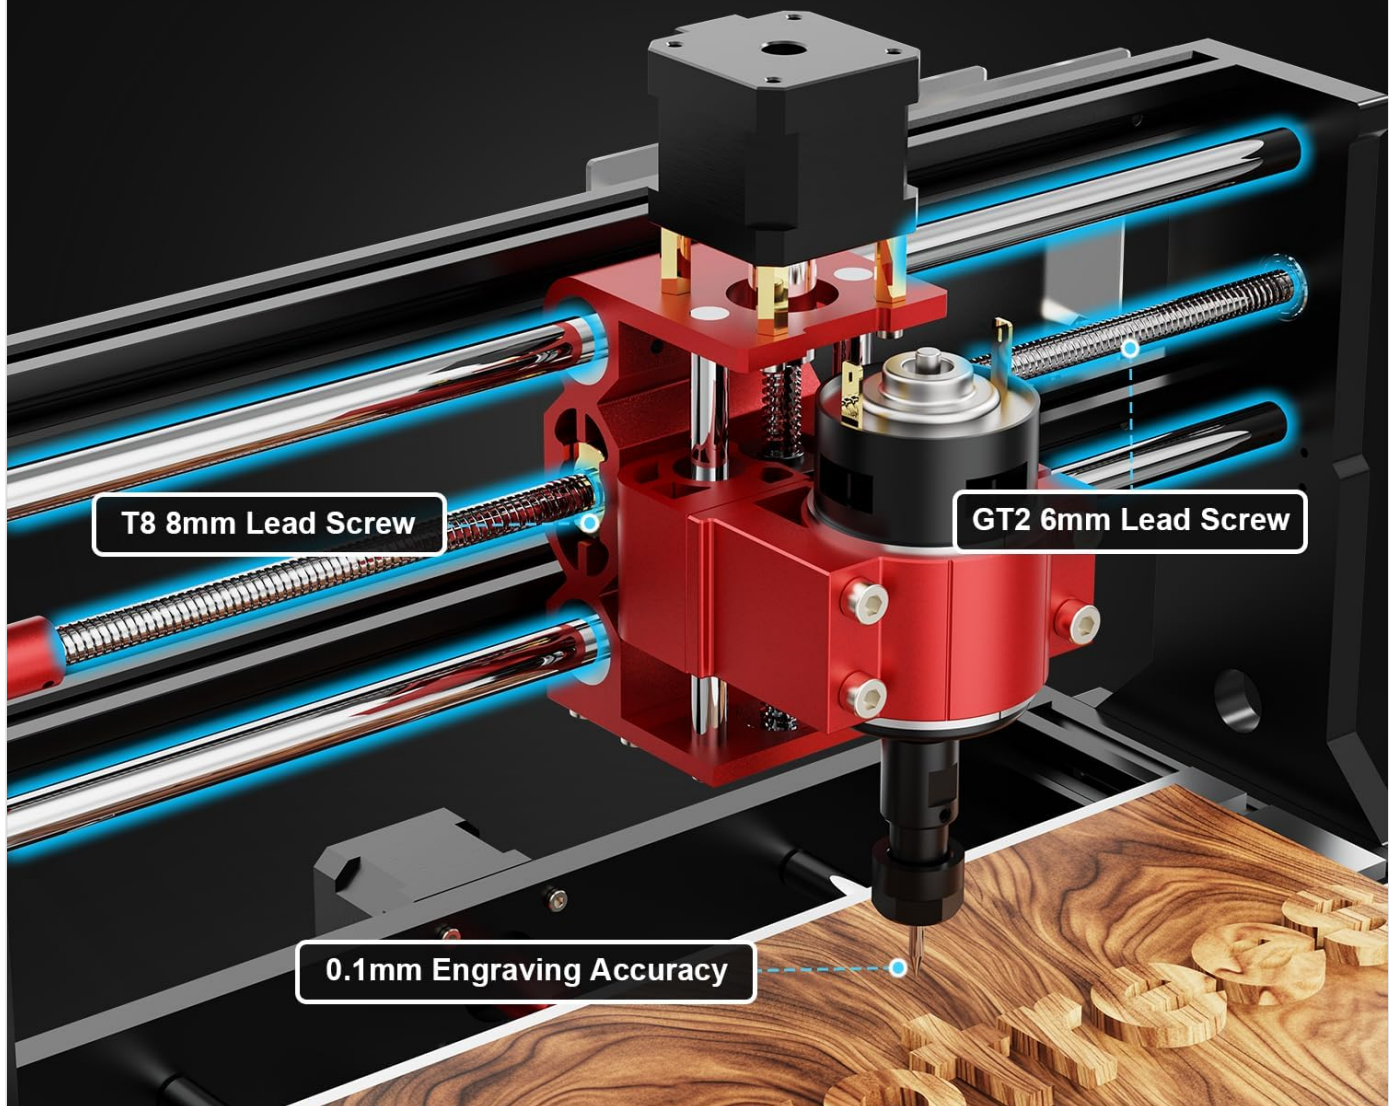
Close-up view of the Twotrees TTC 3018 Pro's mechanical components, emphasizing the T8 8mm lead screw and GT2 6mm lead screw, which contribute to its 0.1mm engraving accuracy.
